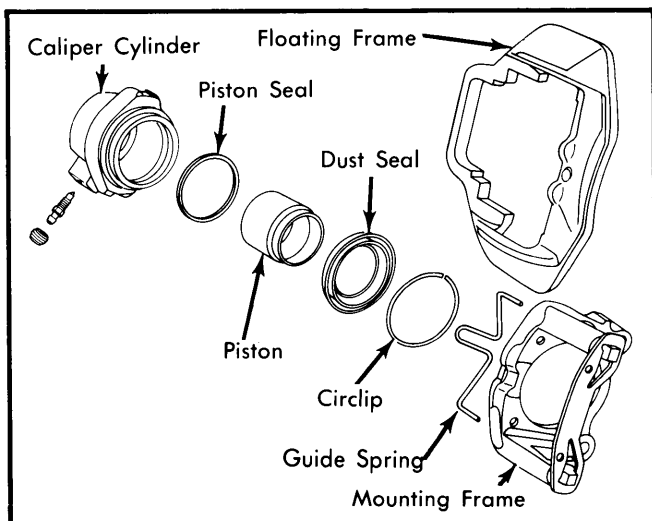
Exploded View of Audi 5000 Front Disc Brake Caliper Assembly
